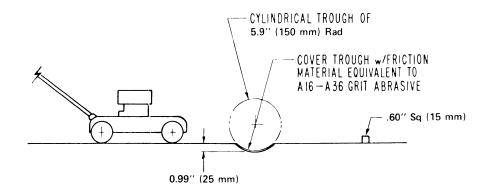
OBSTRUCTION TEST FIXTURE
